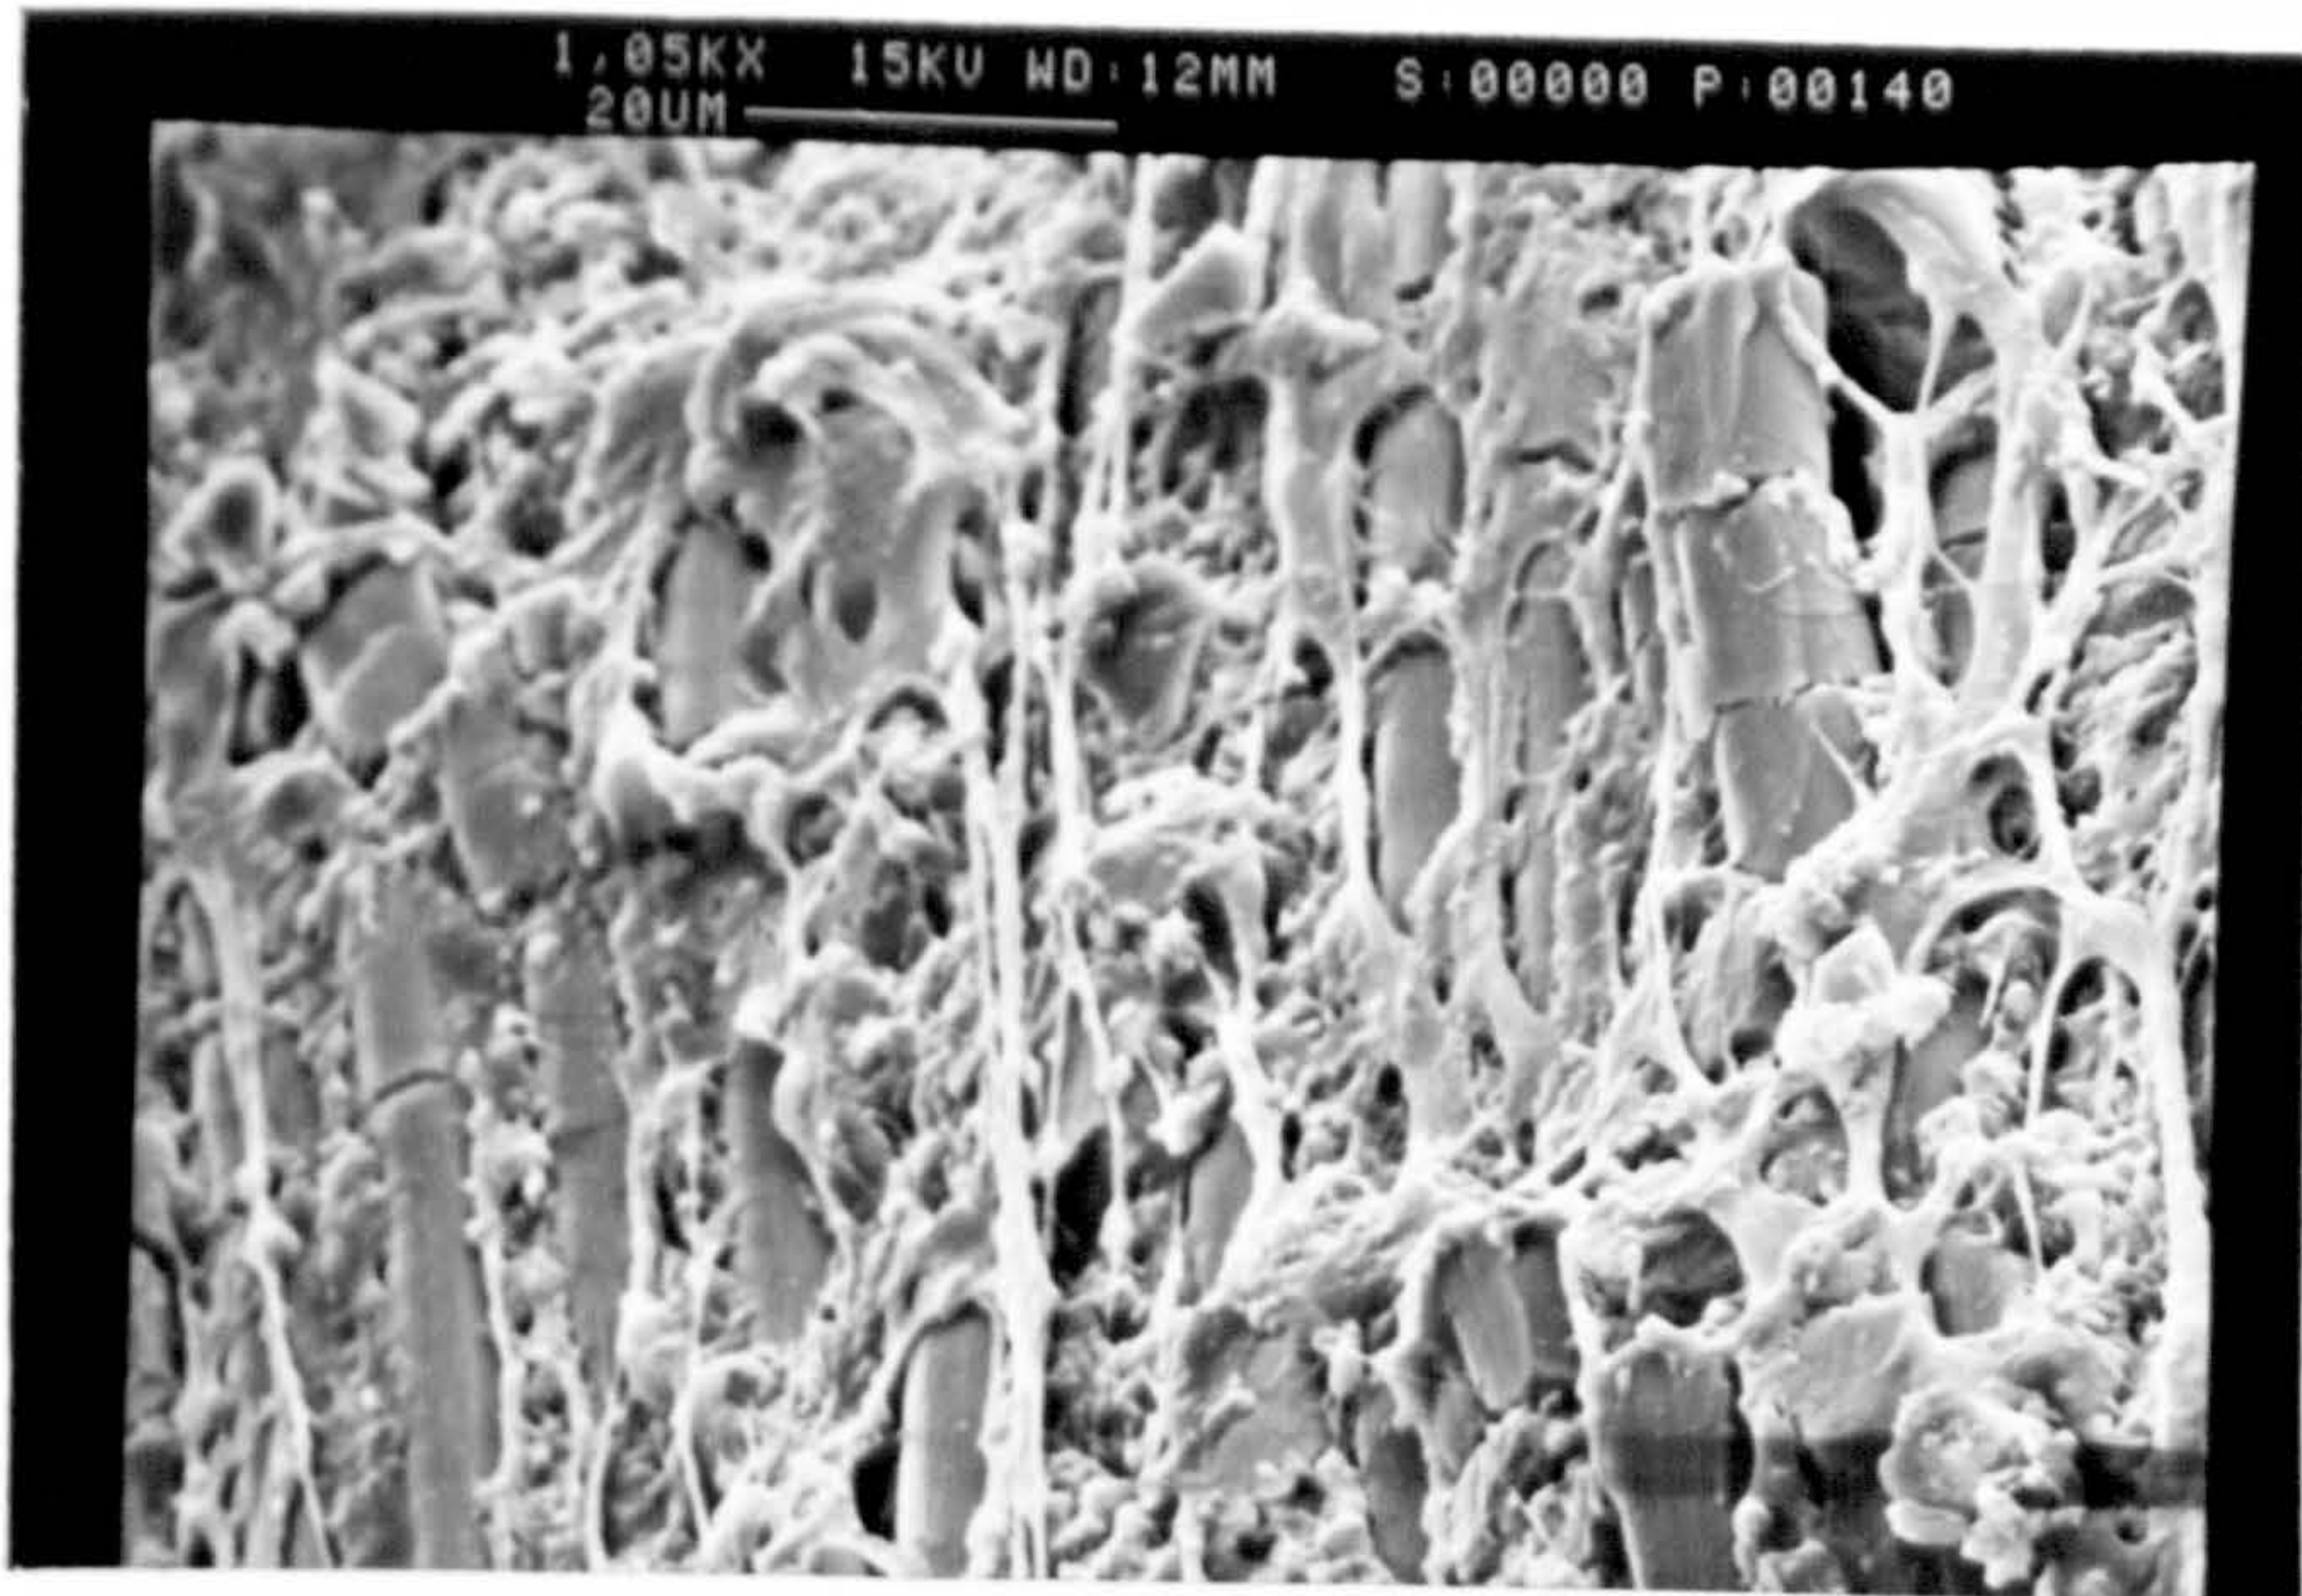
Machined GFRP surface showing debonding and fibre breakage
